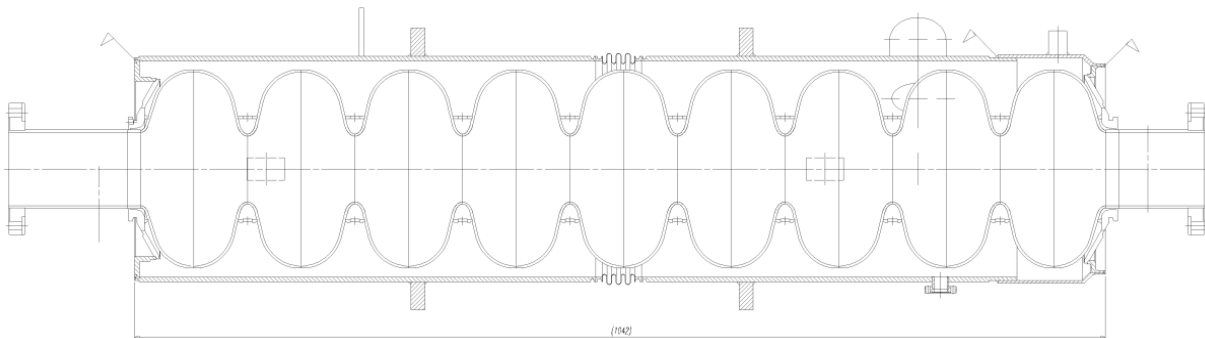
drawing of the cross section for the cavity assembly with the modified He tank
